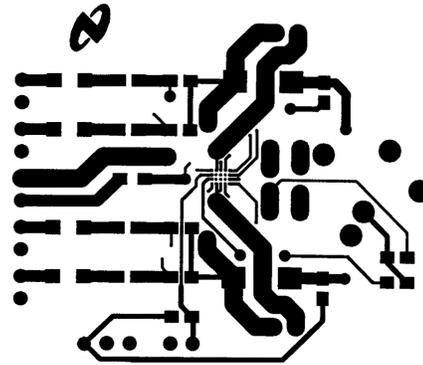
Recommended 20-pin DSBGA PC Board Layout: Component-Side Layout
